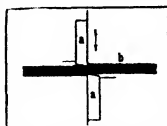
SHEAR BLADES (a, b) BLADES. (b) PLATES BEING SHEARED
